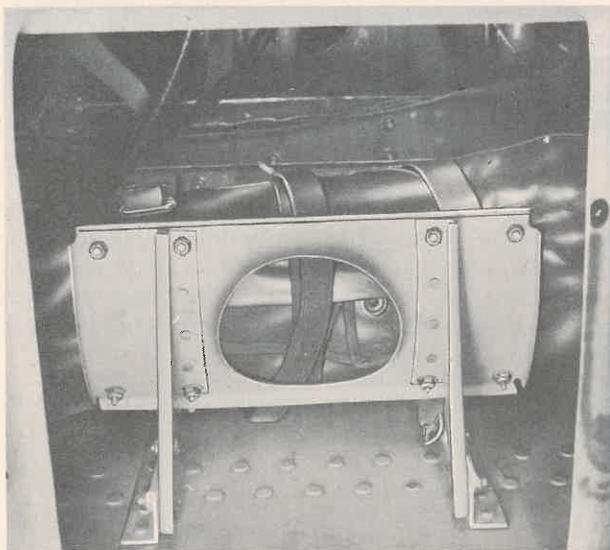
Airplane and Engine Tool Kits, P-63A-1 Through P-63A-6
